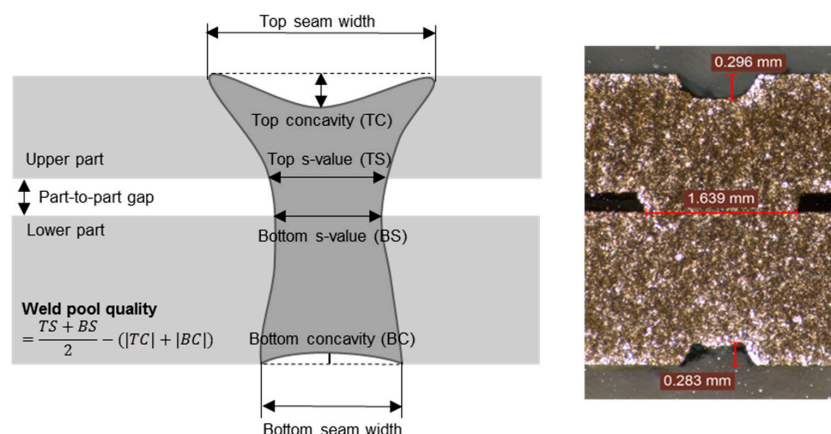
Definition of weld pool quality and an example of the cross sectional view at the middle of the specimen.
